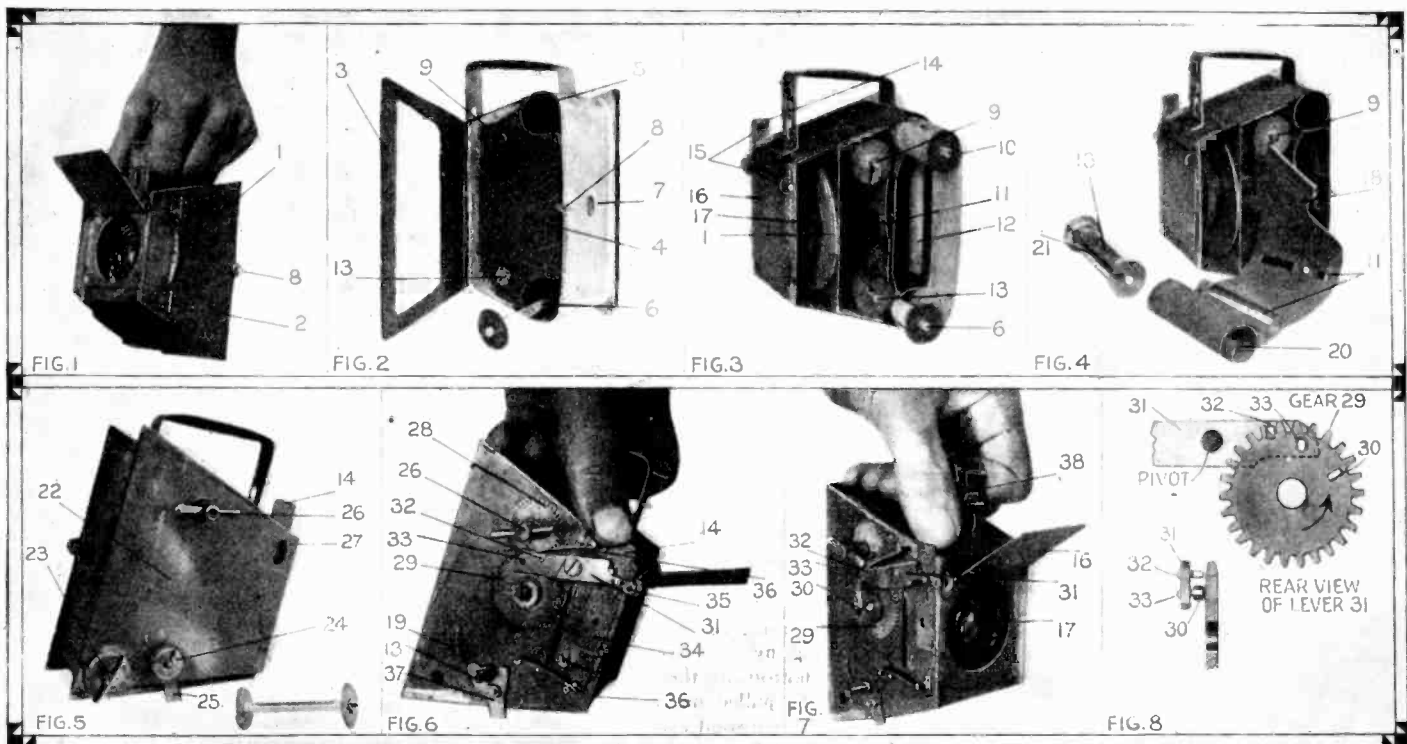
Shows the right-hand side of the camera. "22" is a shell of light metal which covers the camera gearing. "23" is a knob for winding the film into the lower receptacle after the exposure is made. "24" is a knob on the end of the shaft in the lower curtain roller. By revolving this knob more tension is placed on the curtain spring—thus making the shutter travel faster and giving a faster, or shorter, exposure on the film. "25" is a ratchet for releasing this tension. "26" is a knob with which the curtain is reset. The arrow on this knob points to the different figures on the side of the camera—thus indicating the opening in the curtain which will pass the lens. "14" is the shutter release. "27" is also a shutter release. The arrow on the knob "24" indicates the various tensions placed on the curtain spring. This may be increased or lessened at the will of the operator in keeping with the exposure which he desires.
